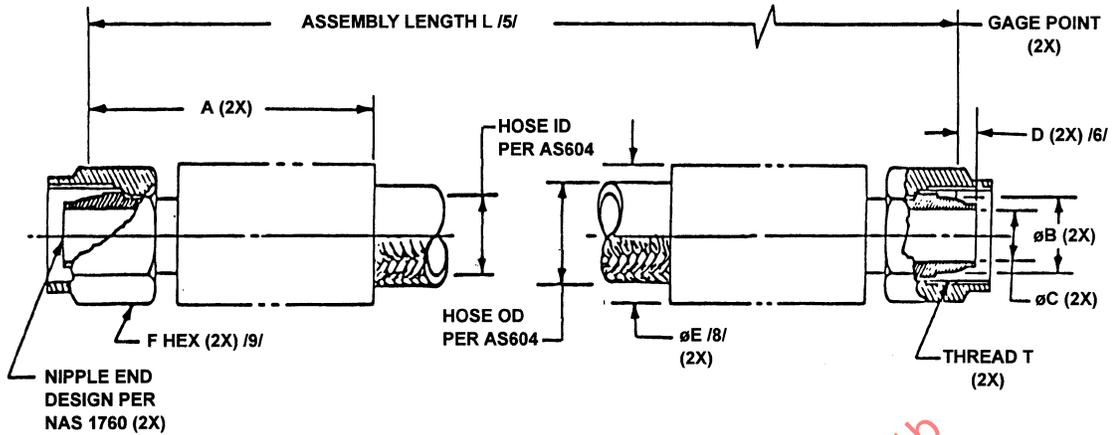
HOSE AND FITTING DIMENSIONS
